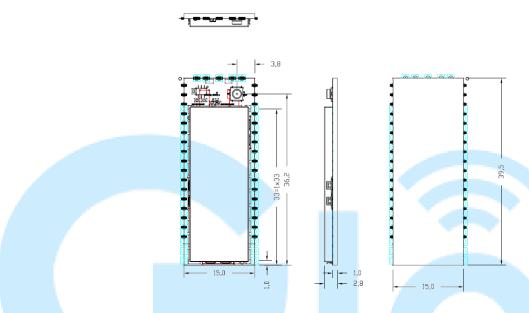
GL6509 PIN HEADER VERSION DIMENSIONS
